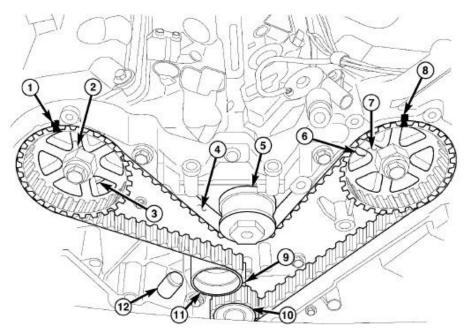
Timing Gear Components Courtesy of CHRYSLER LLC
